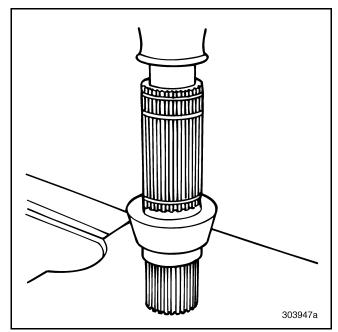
Installing Spigot Bearing (T313L/T318L Shown)
